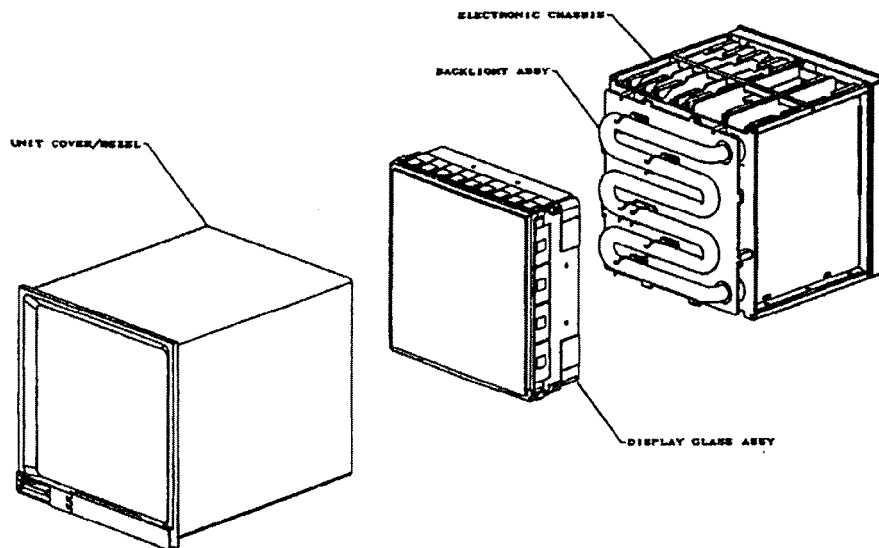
Exploded view of 777 flat panel display unit showing backlight assembly.
